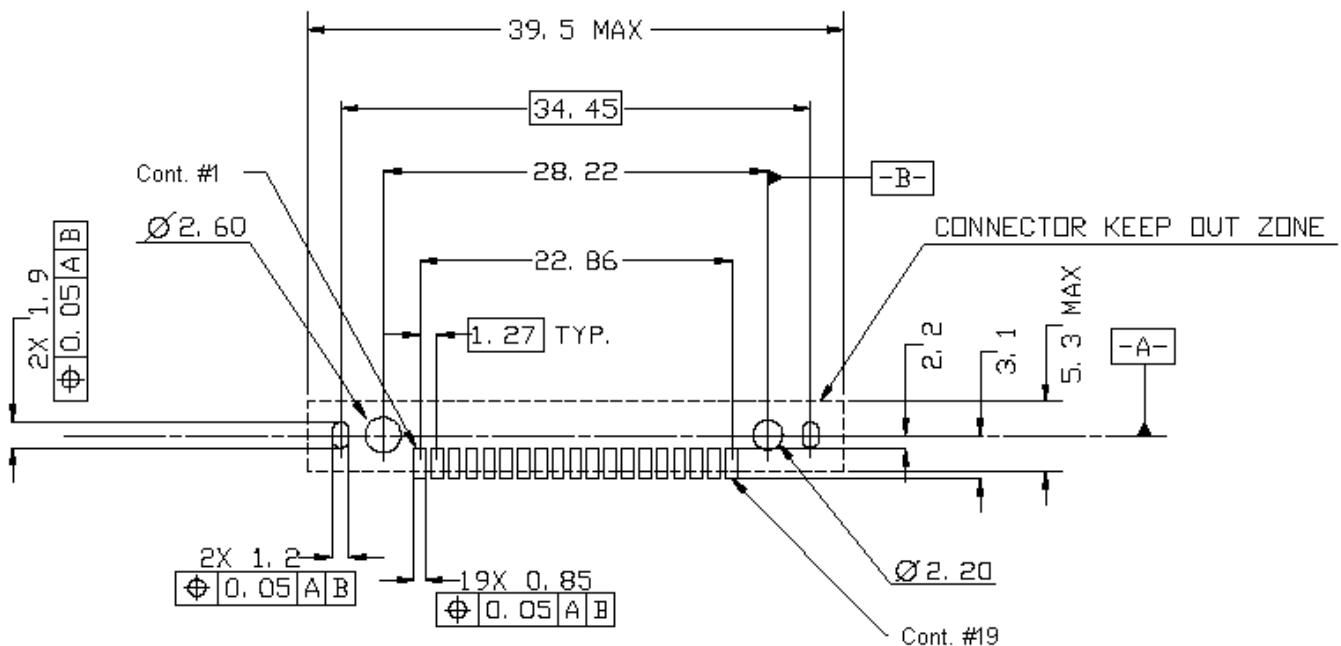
2 Lane Right Angle Through Hole/Press Fit Free (Plug) Footprint
